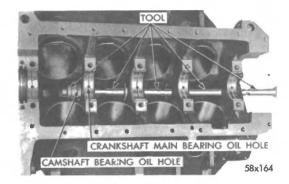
Removing Camshaft Bearing Using Tool C-3132A
